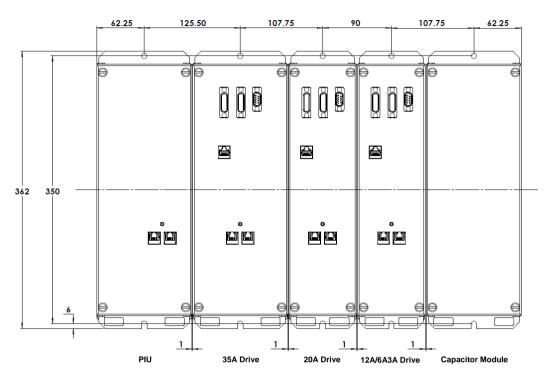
PIU, 35A, 20A, 12A/6A/3A drives and Capacitor Module mounting hole positions for Duct, Wall and Recessed mounting Array
